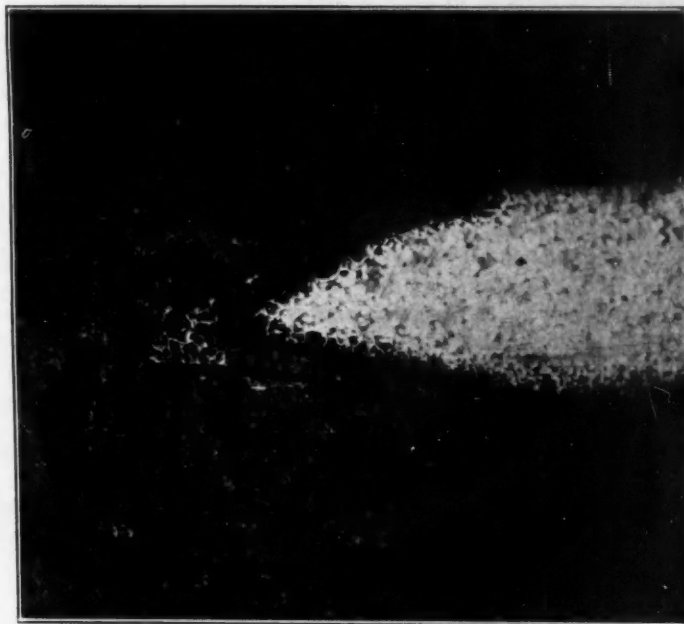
MICROPHOTOGRAPH OF THE JOINT BETWEEN AN IRON AIR-CRAFT-ENGINE CYLINDER AND THE STEEL RADIATING FIN THAT WAS WELDED IN PLACE
